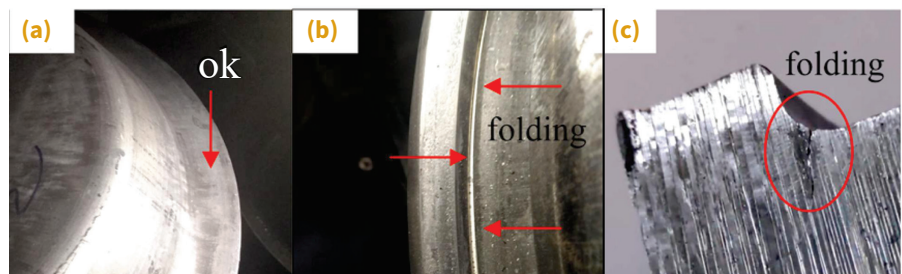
(a) pre-forging flange; (b) final forging flange; and (c) section after cutting final forging blank.
